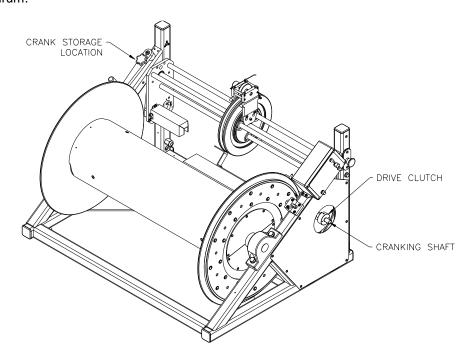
WINCH DRIVE CLUTCH LOCATION
